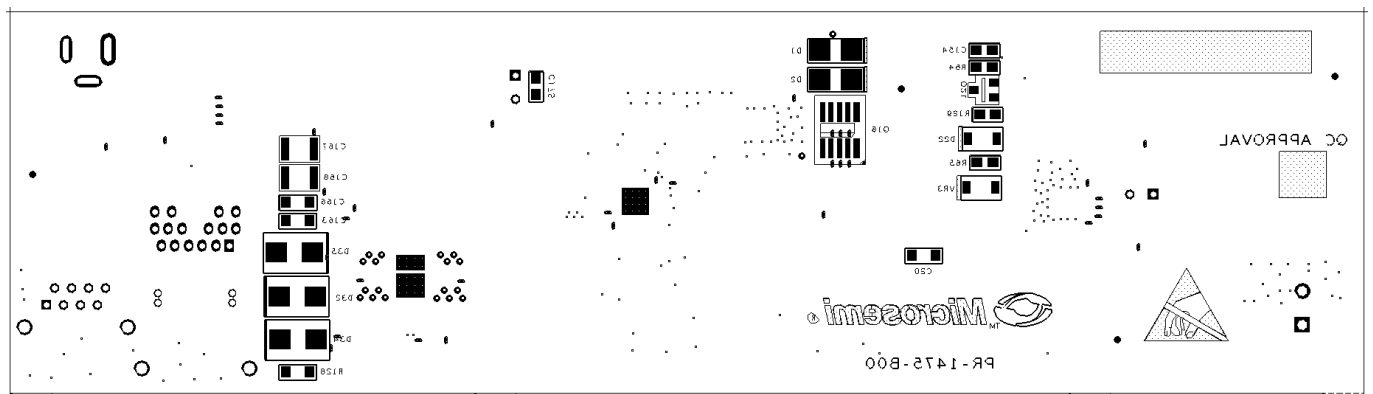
Bottom Silk and Solder Mask (Image Looking From Bottom)
